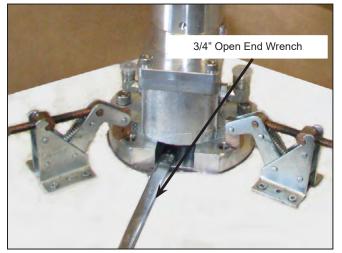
Thru-shaft motor on work bench showing position of slot and 3/4" open end wrench.
